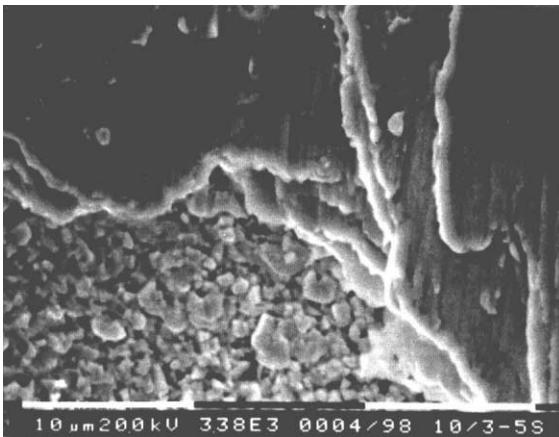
An SEM image of worn region of Tool B after cutting for 5 s, showing severe galling that consists of a few thin layers of smeared workpiece material (at 75 m/min and 0.14 mm per tooth).
